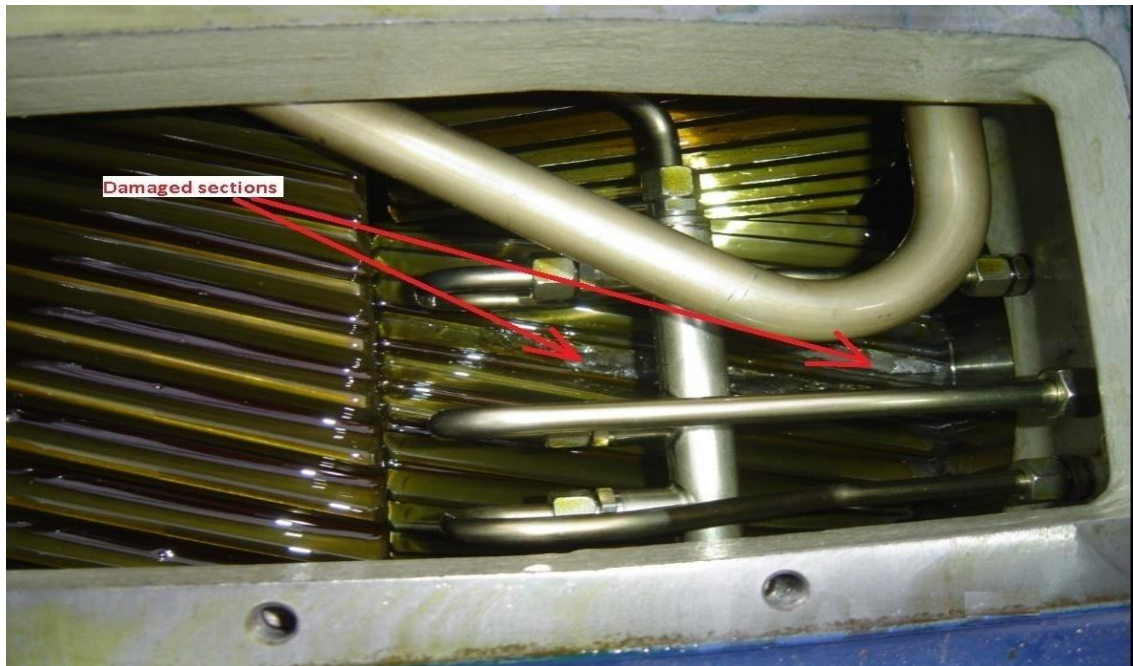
Damaged gearboxes (courtesy of Aurecon).
